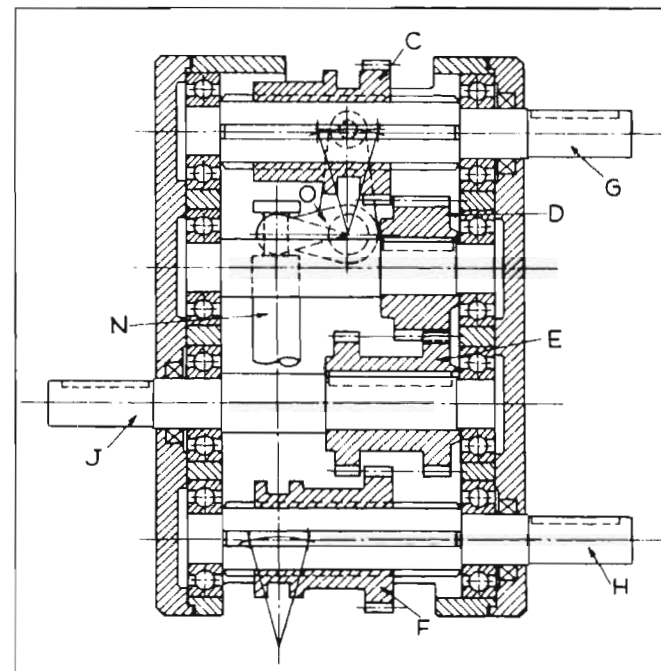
Developed section of gear train showing types of gears and their position when the control lever is in a neutral position.
